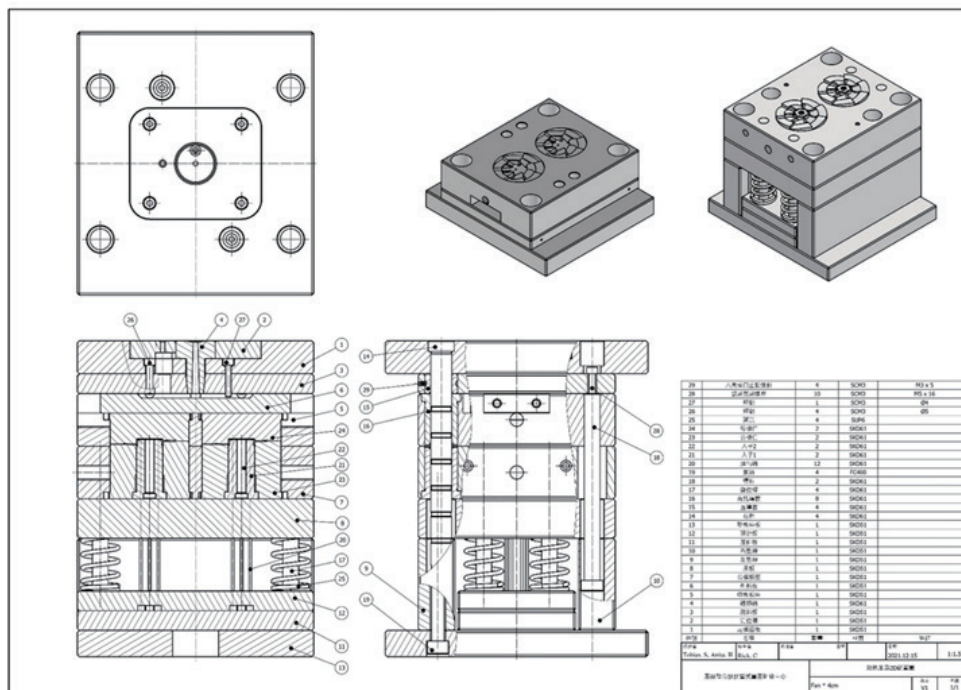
Design of the cooling fan mold for cooling fans of electronic chips of vehicles.
